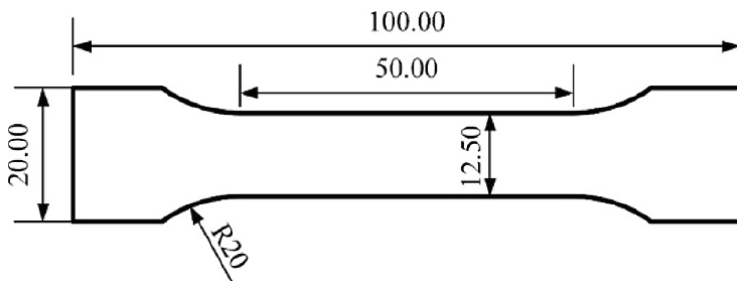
Schematic of tensile test specimen size and dimensions. [Refer to ASTM E8 standard, adapted in accordance with [22].]
